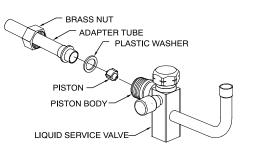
Liquid Service Valve with Heating Piston and Adapter Tube Brazing Connections
